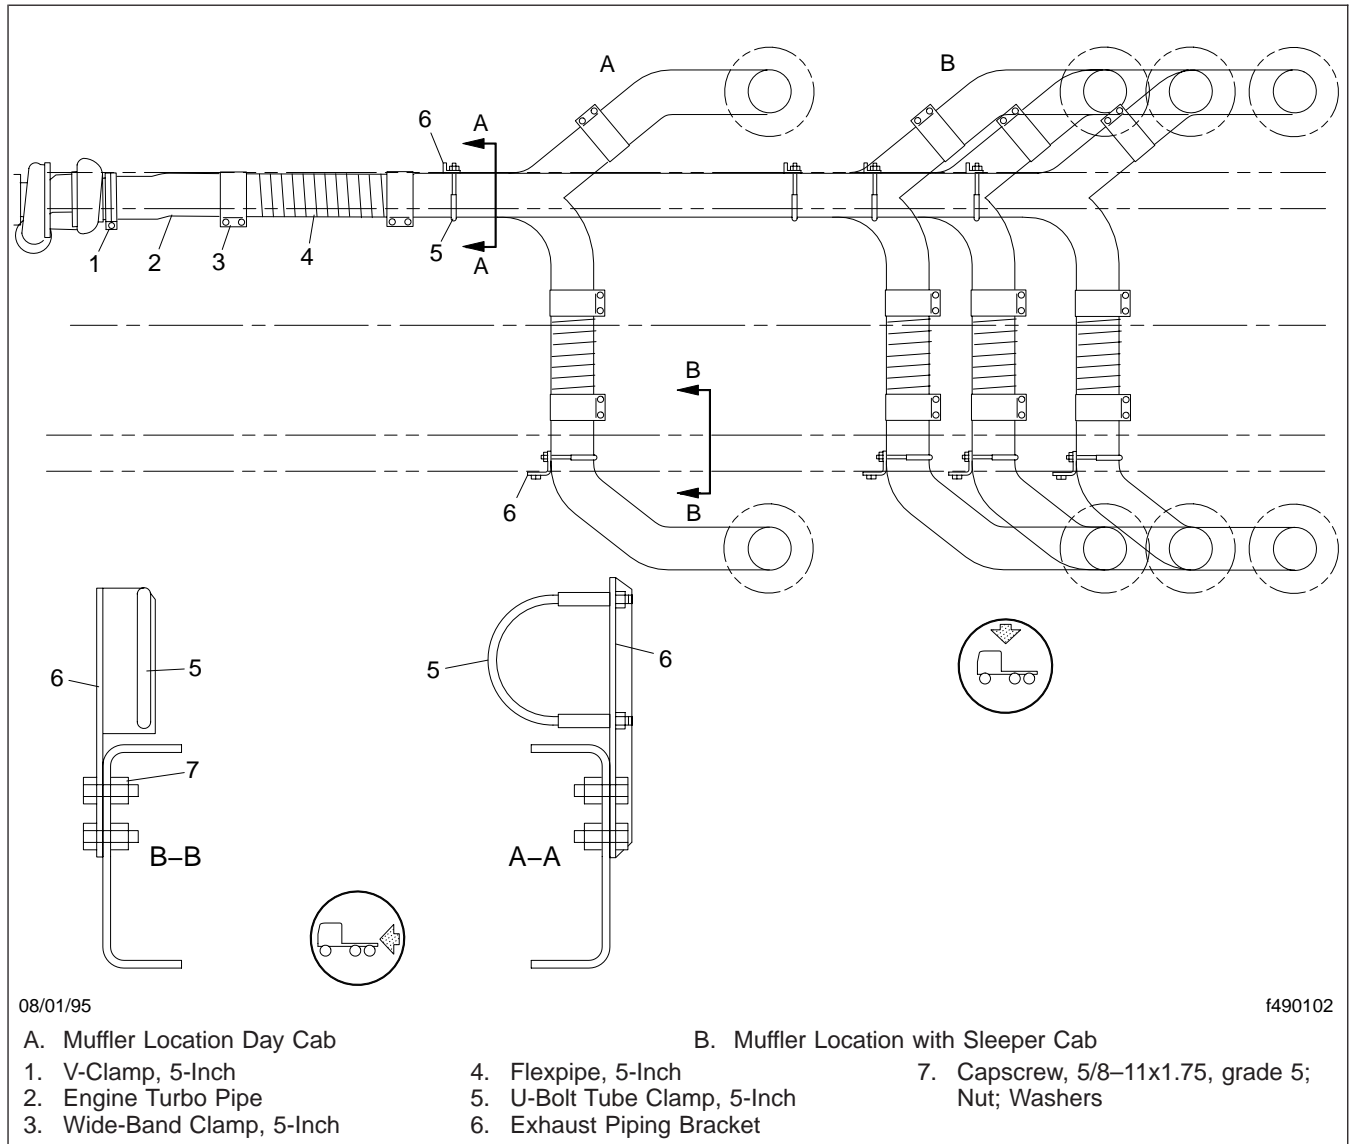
, Exhaust Piping for Dual Stationary Outboard-Mounted Mufflers
